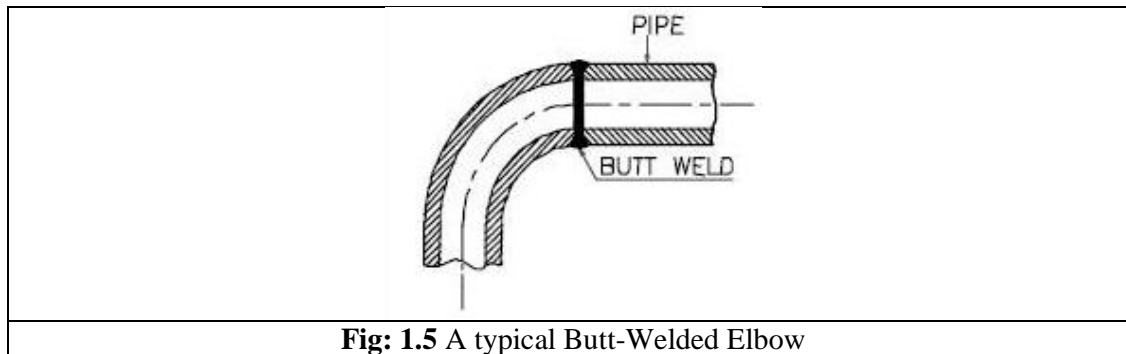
A typical Butt-Welded Elbow
